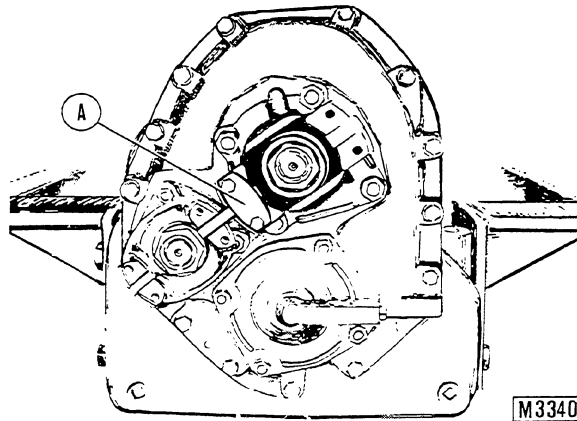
Securing transmission output shaft using retainer 75297149 (A).
